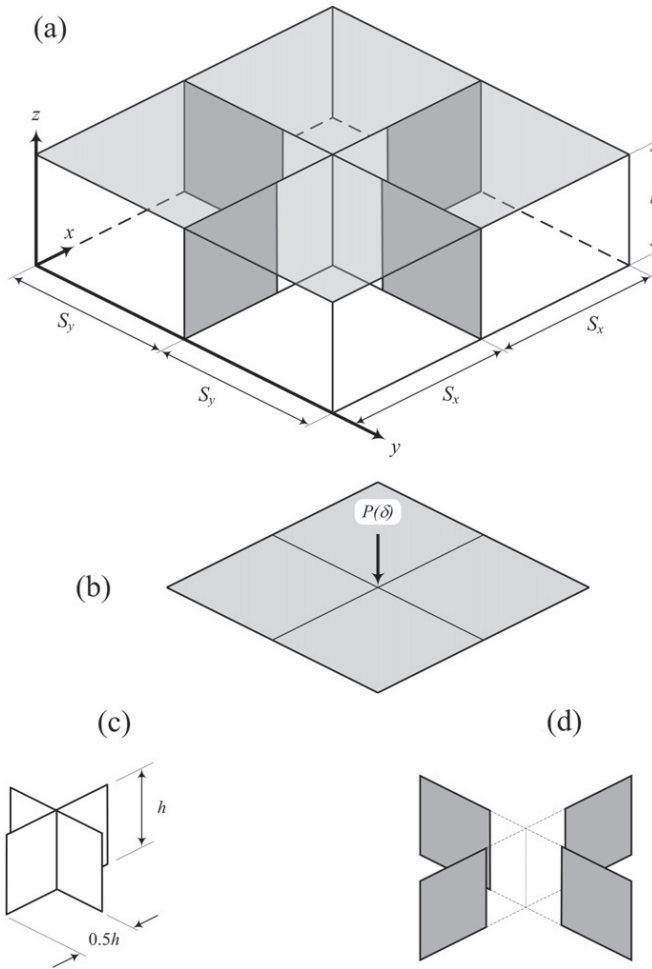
(a) An example of the structure of the side of a ship: shell plating and one plate girder intersection, (b) shell plating, (c) cruciform with a height equal to the girder height, (d) four remaining sections form web girders.
